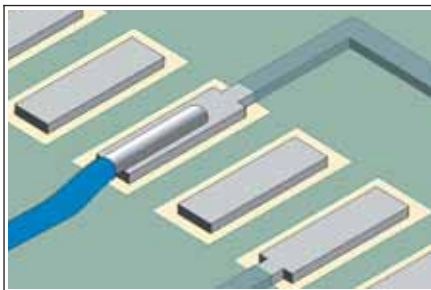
Acceptable Wire soldered parallel to conductor, contact, SMT pad.
